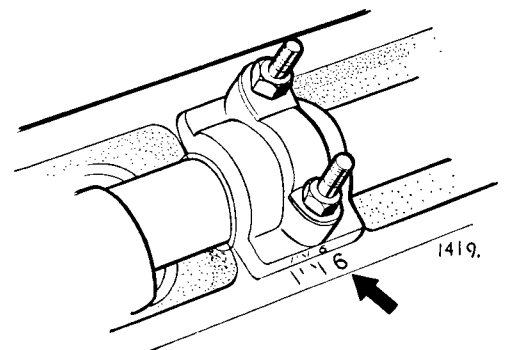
Showing the corresponding numbers on the bearing cap and cylinder head
